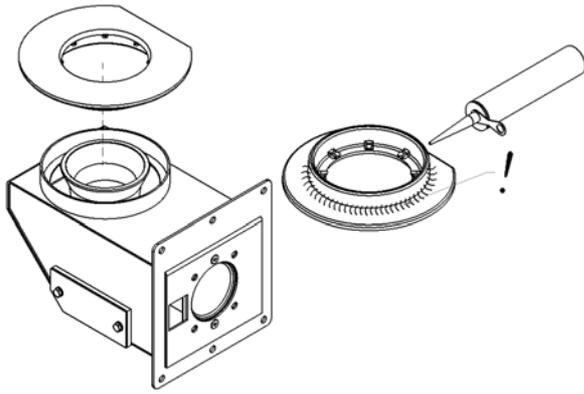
Boiler conversion from the right-hand to left-hand design – dismantling of burner and blind flange
